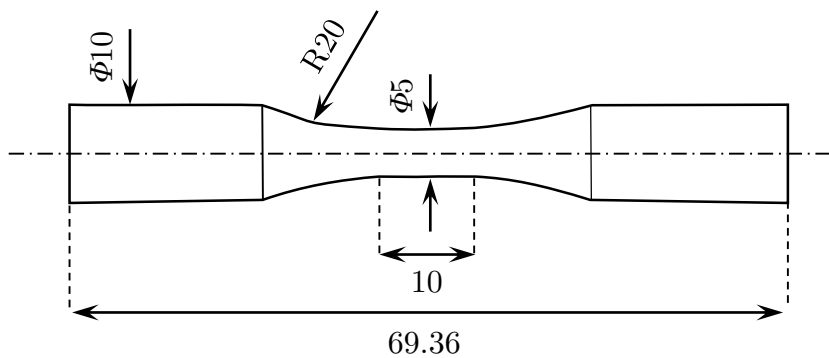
Geometry of smooth specimens used for low-cycle fatigue tests (dimensions in mm).
